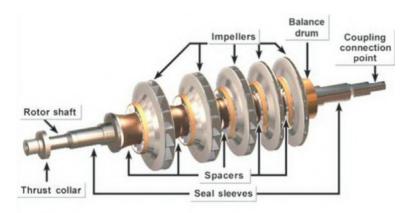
Multistage rotor assembly showing the balancing drum on a compressor's rotor.
